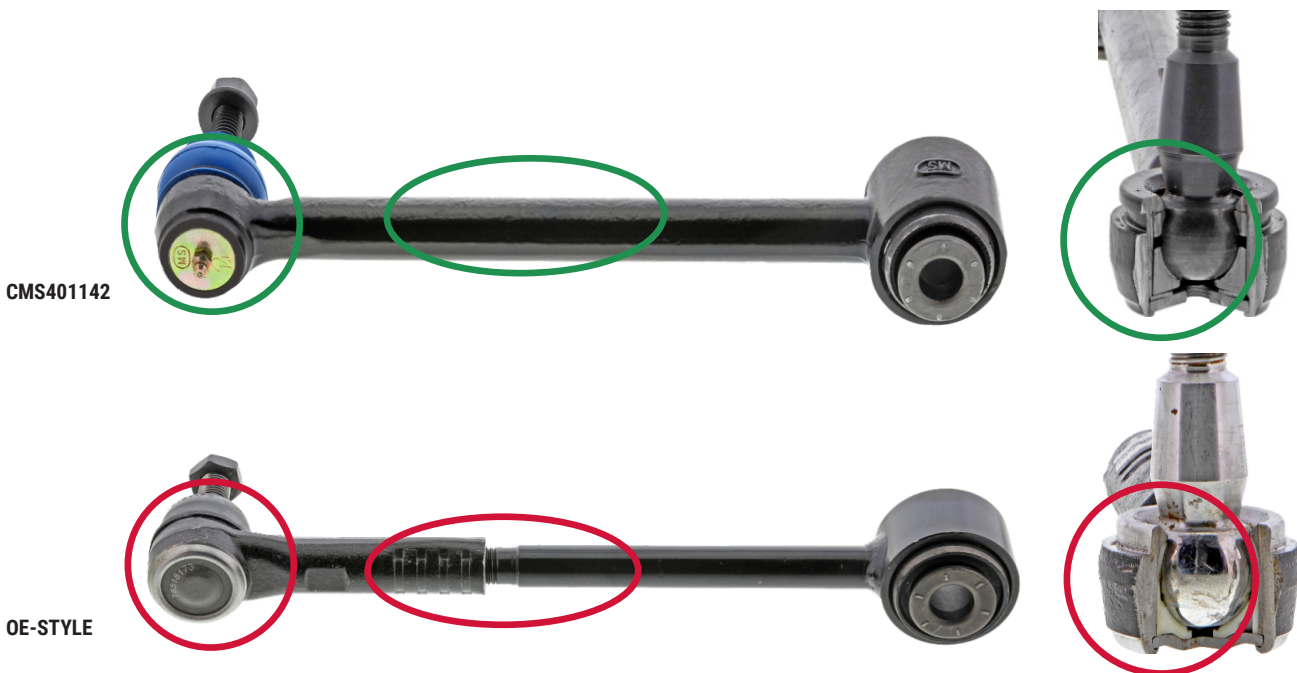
Mevotech Supreme control arm with self-lubricating greaseable sintered upper and lower metal bearings and improved 1 piece solid forging (top) vs OE-style control arm 2-piece design and plastic bearing (bottom)
